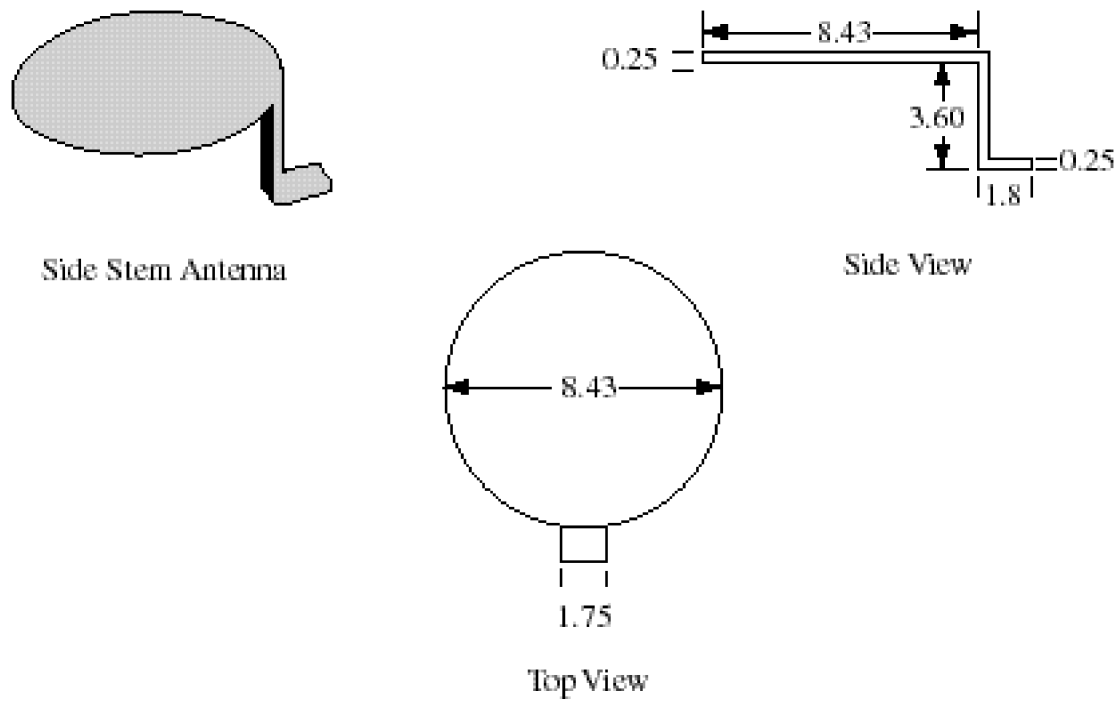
A 5 GHz Side Stem Antenna and its dimensions (all dimensions in mm).
